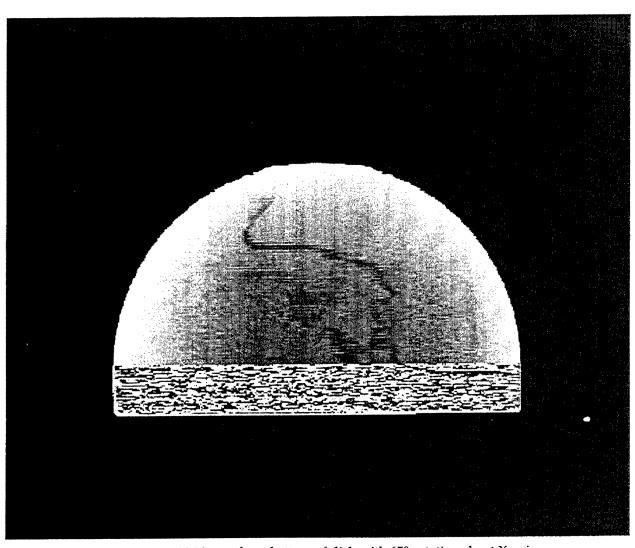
19.20 mm from bottom of disk with 65° rotation about X-axis.
